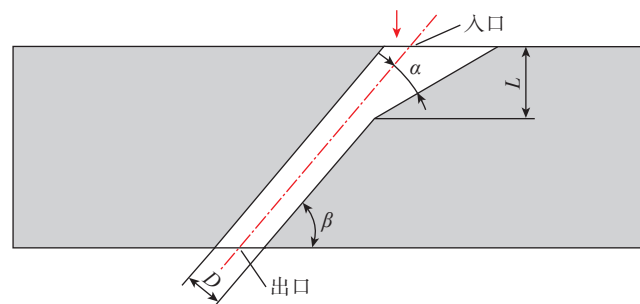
Picture of diffusion section processing of shaped hole based on finished cylinder hole
